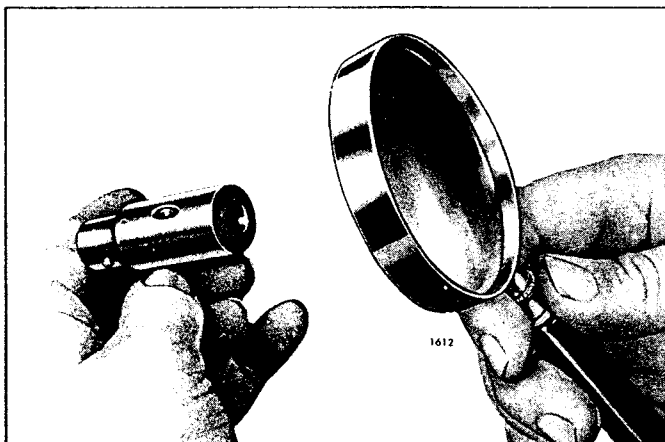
Examining Sealing Surface with a Magnifying Glass
